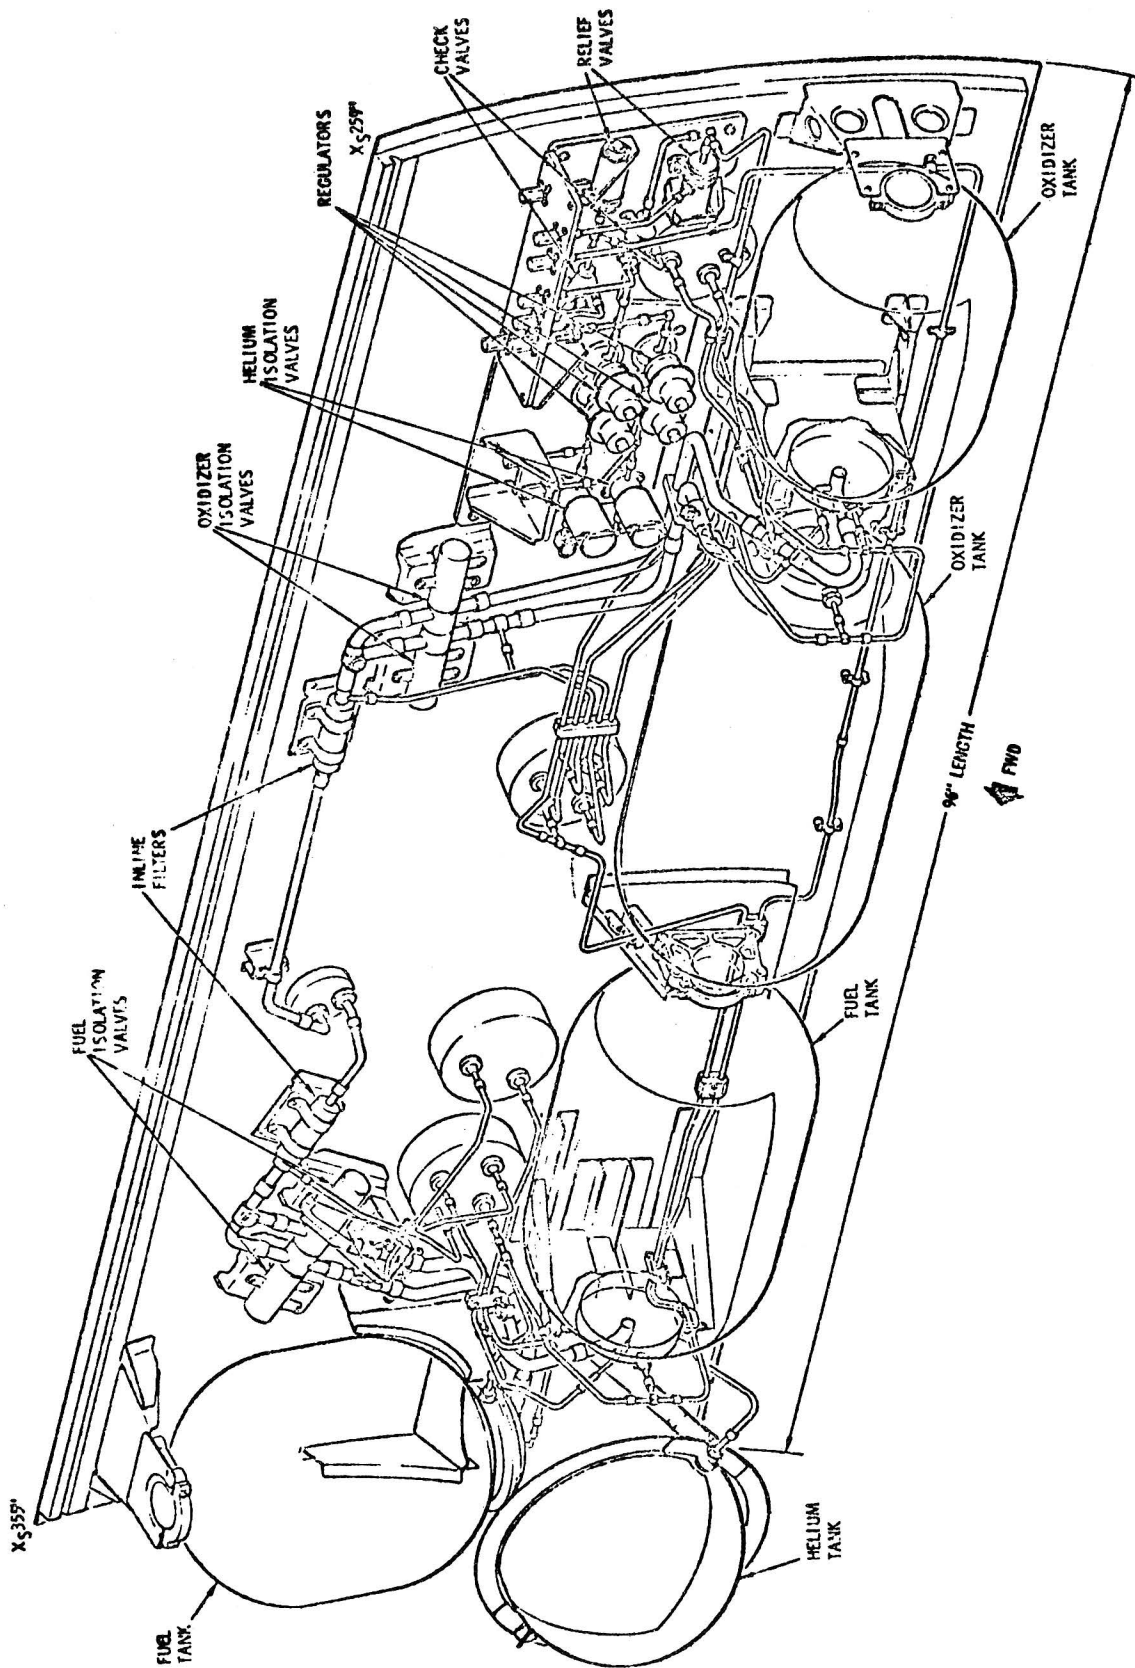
SM RCS PANEL ASSEMBLY QUADS A AND C.
